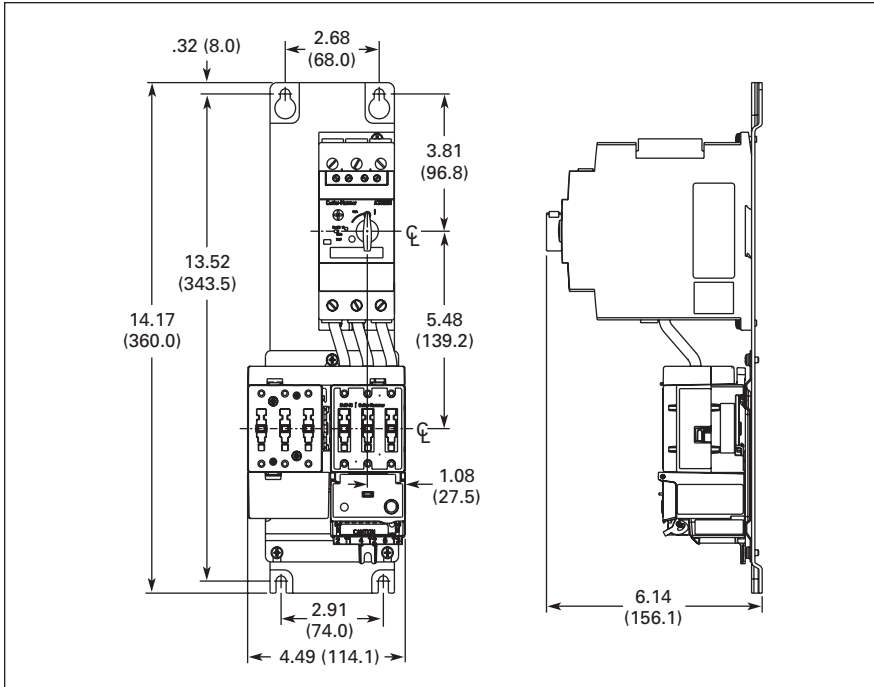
Non-reversing Combination Motor Controller N309 (LSA, A309 MMP + N111D [Size 2] Contactor) — Approximate Dimensions in Inches (mm)
